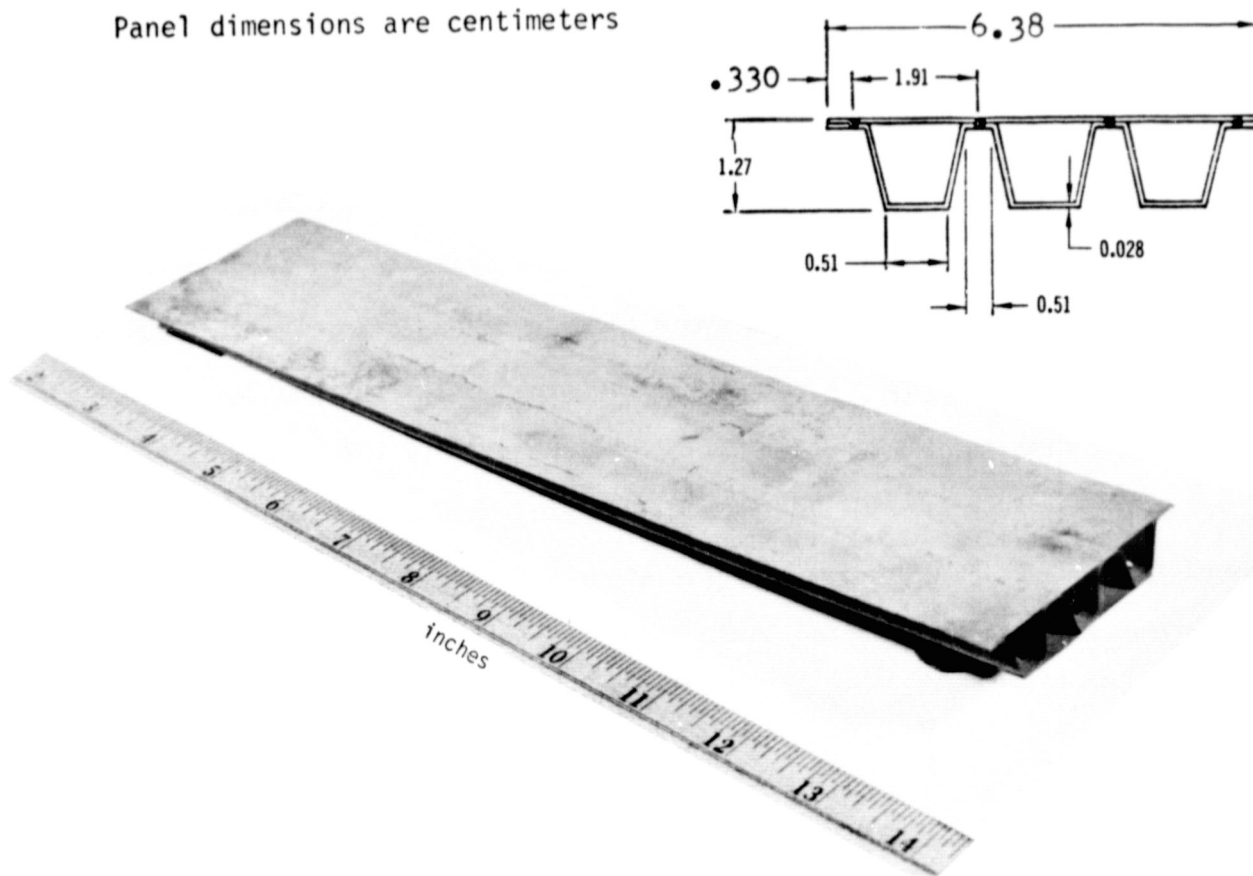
SUBSIZE PANEL R2 CROSS SECTION AND PHOTOGRAPH AFTER TEST
